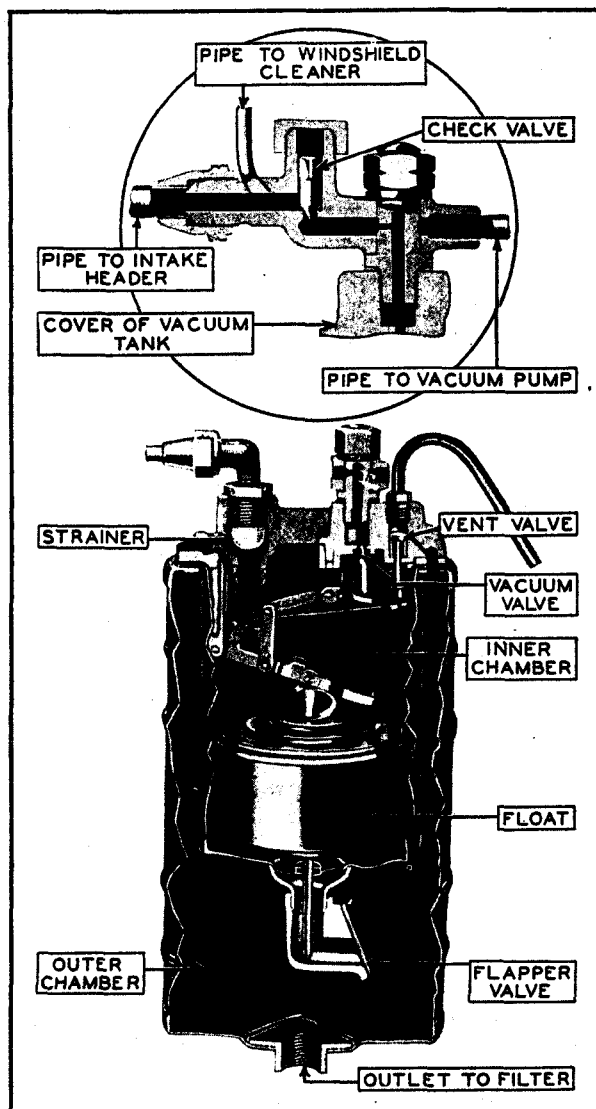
Sectional View of Vacuum Tank and Check Valve
